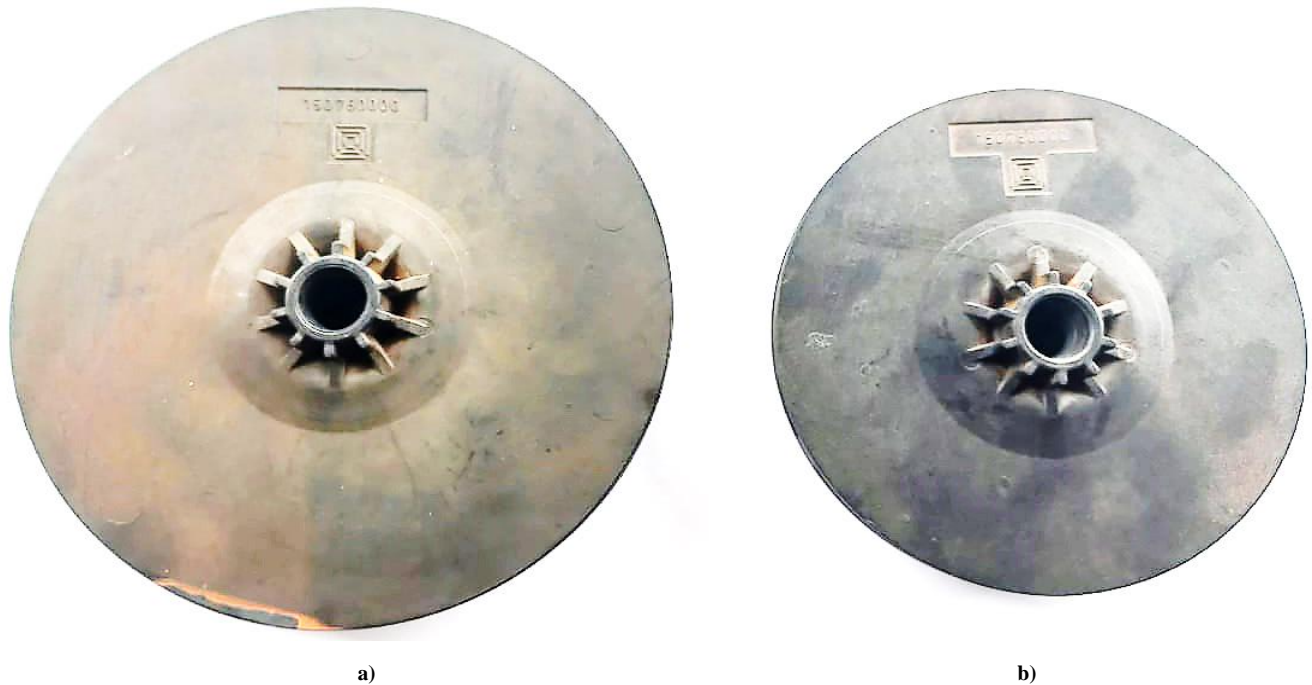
Pump impeller: a) Original impeller, b) Impeller after trimming
